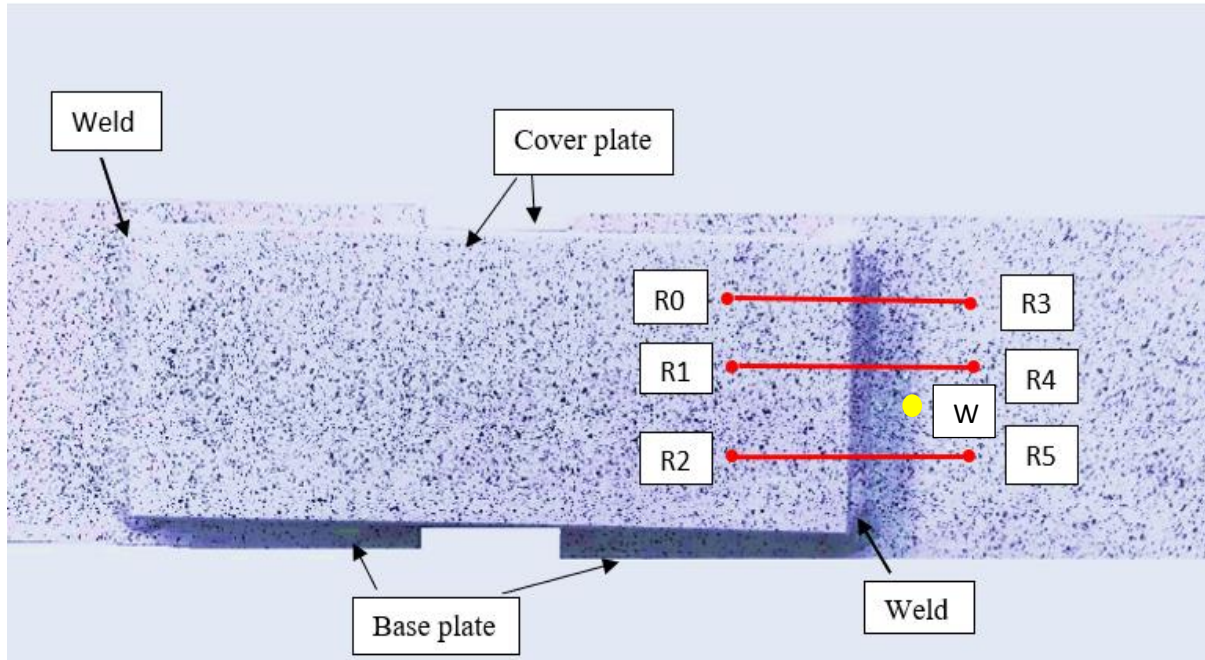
Several measurement key points were assigned in the test piece.
